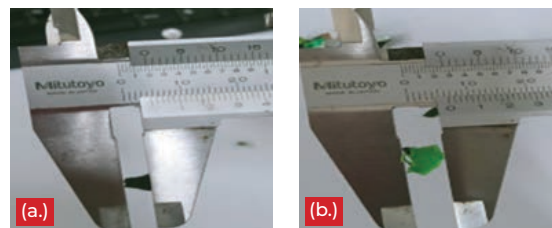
(a) PCB and (b) IC output size measurement using a caliper
